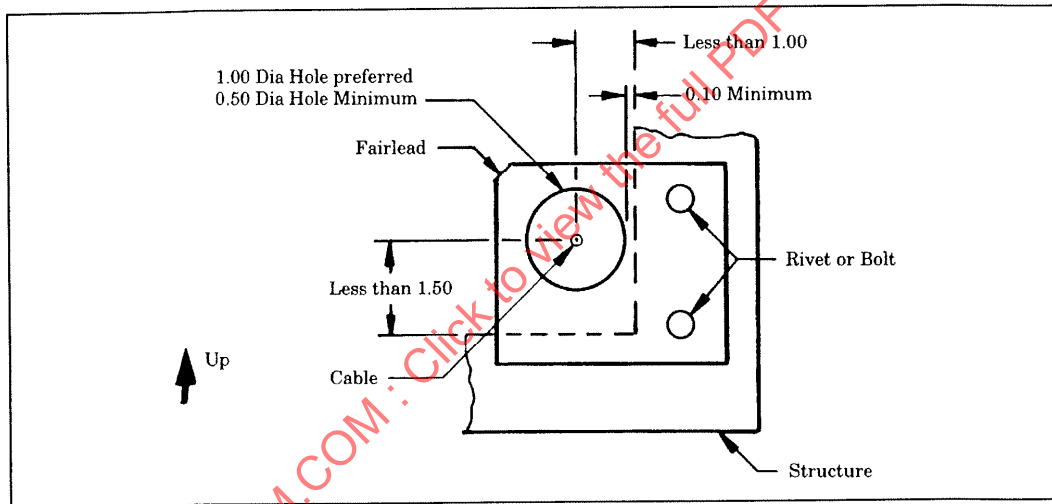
TYPICAL FAIRLEAD INSTALLATION
